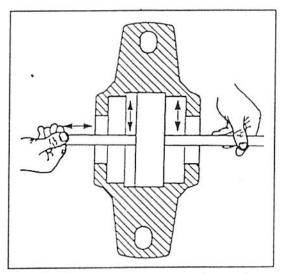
Measure the clearance by moving the feeler gauge back and forth.
